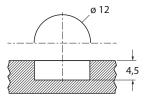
Hole dimensions for inserting the tag in metal (TW-R10...)
